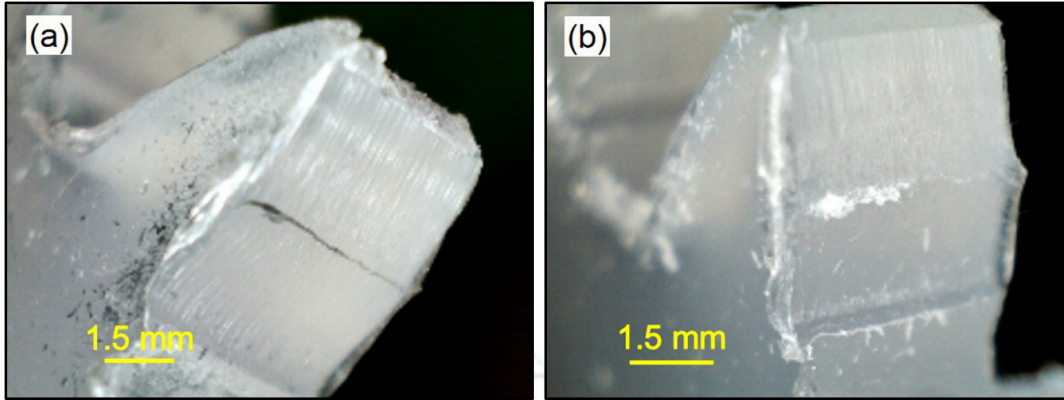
Worn out of test gear at 2 Nm against (a) conventional machined gear (after 10.08×10^5 cycles) and (b) WEDM gear (after 4.32×10^5 cycles)
